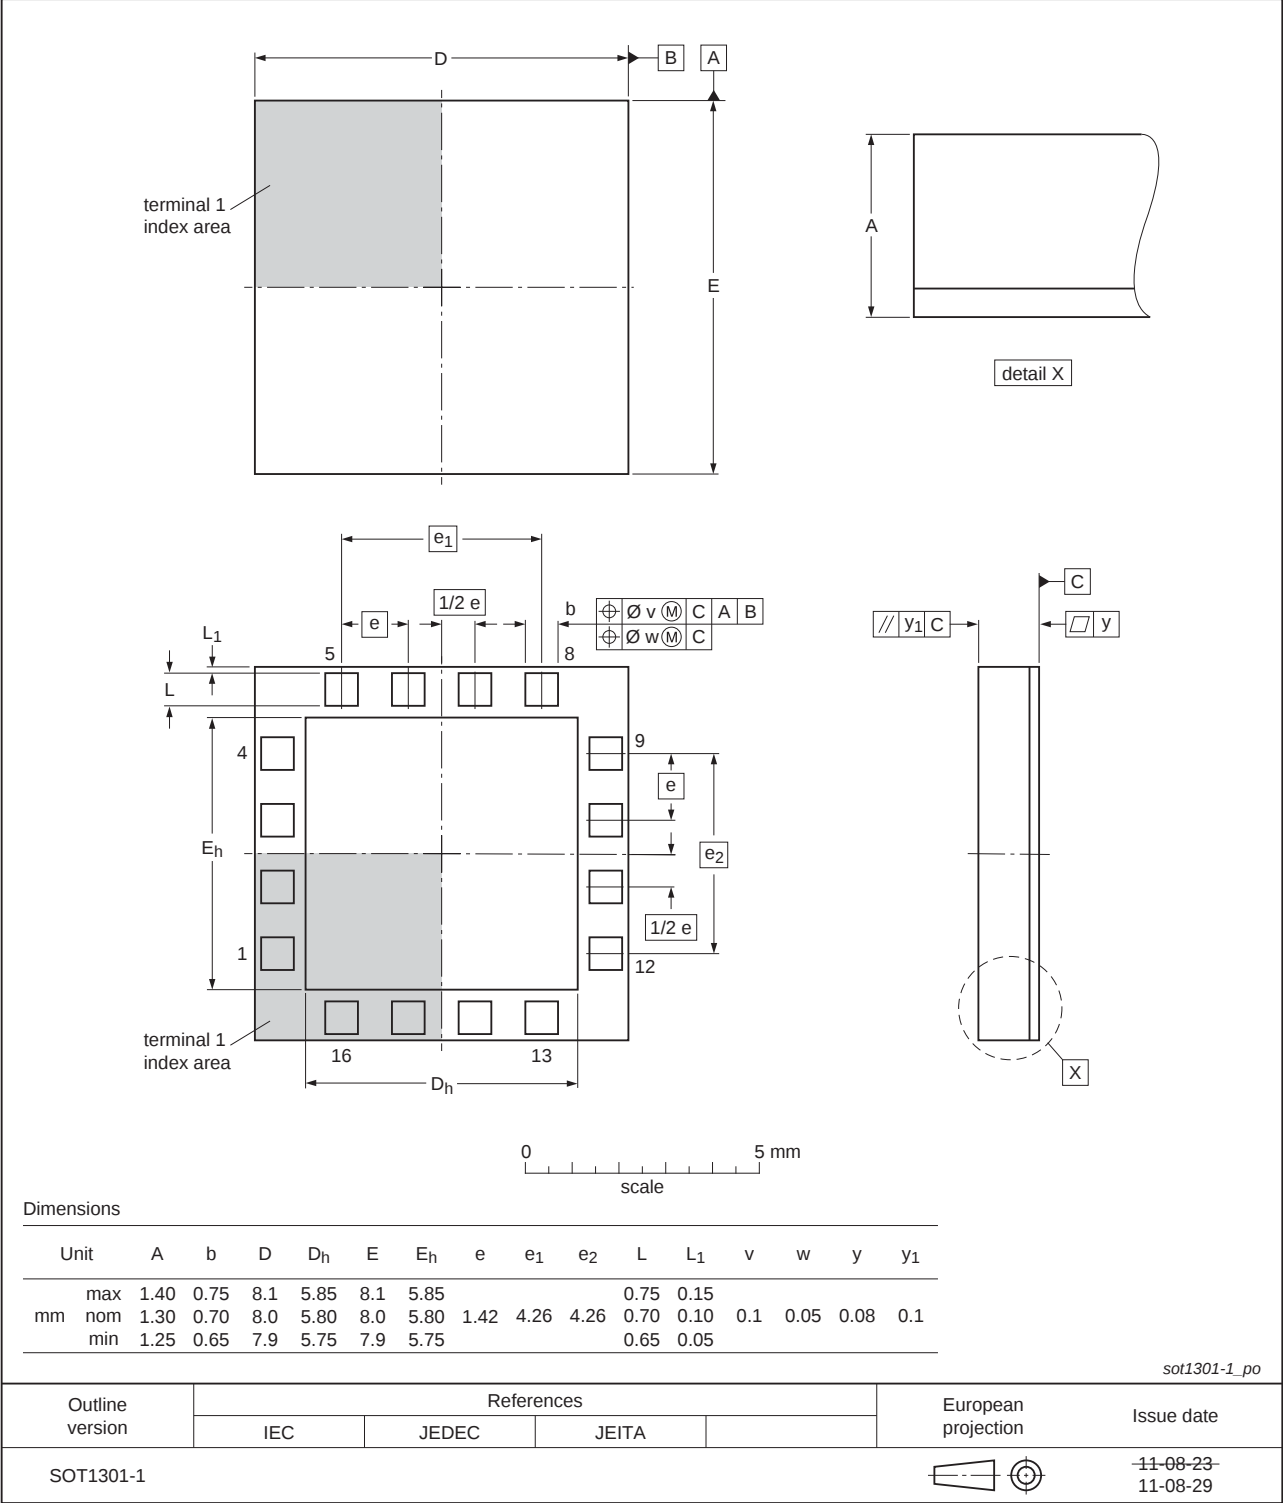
Package outline SOT1301-1 (HLQFN16R)
